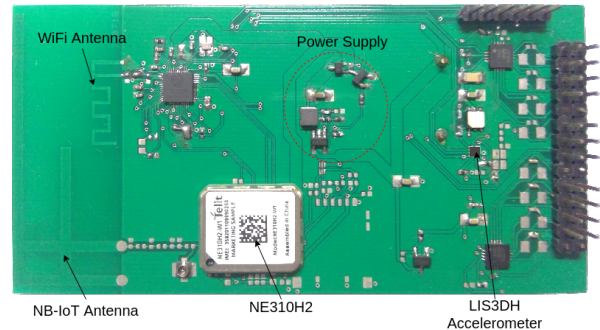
PCB with the ESP32 microcontroller used to control measurements.
